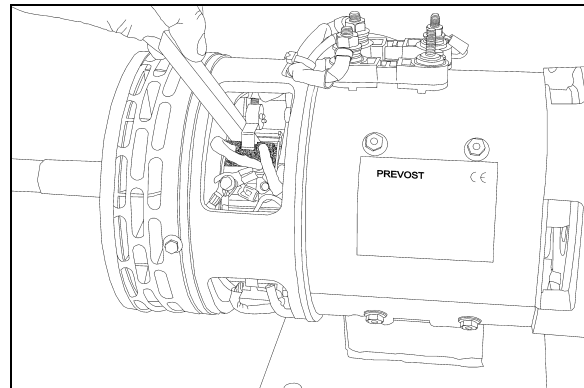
GRINDING WITH THE BRUSH SEATER STONE 22319
